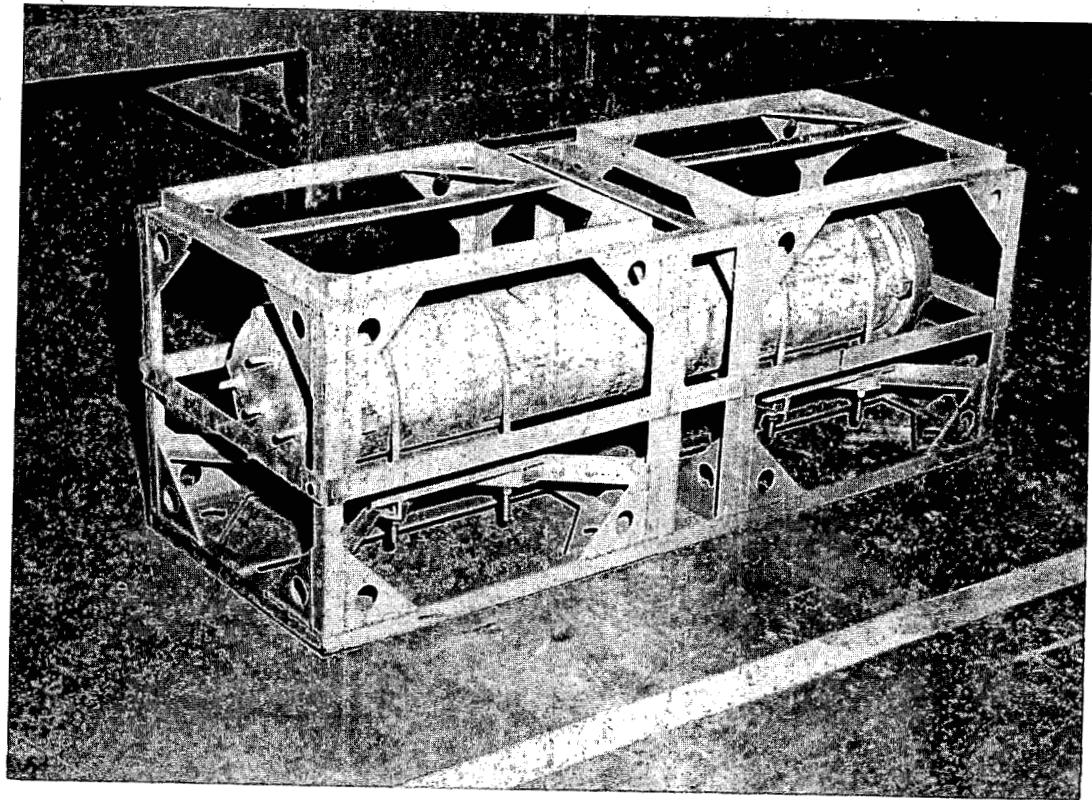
Metal space frame of welded steel angle, inner container. Eight-in. schedule 40 pipe closed off with end cap.
